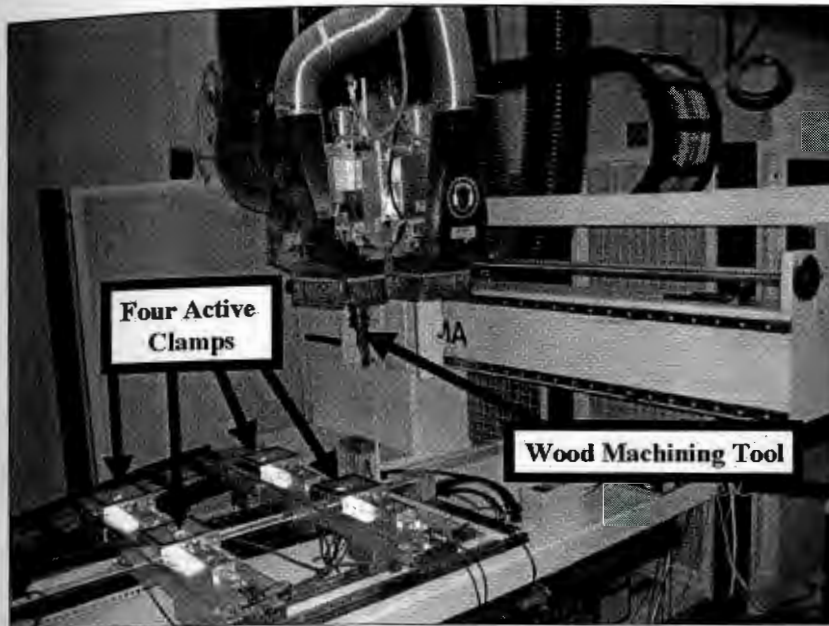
Stationary Wood Machining Tool with Active Clamp Assembly
